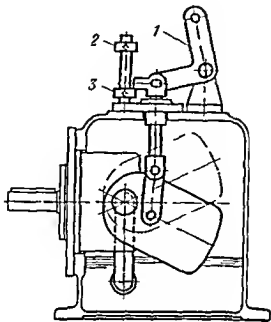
Arrangement for reversing the fluid pressure in axial piston pumps
